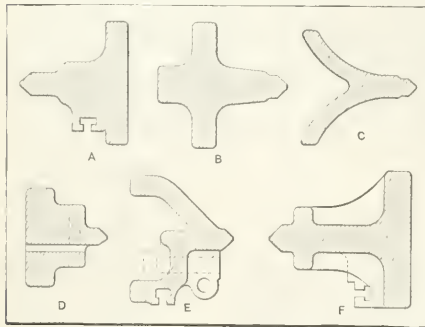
Cross-sections of Drop-hammer Uprights. (A) Waterbury Farrel Foundry & Machine Co. (B) United Engineering Co. (C) E. W. Bliss Co. (D) Billings & Spencer Co.—Model B. (E) Billings & Spencer Co.—Models C and D. (F) Chambersburg Engineering Co.
